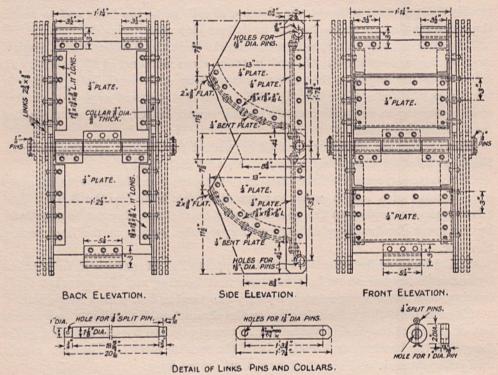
CIRCULAR TYPE OF ELEVATOR BUCKET.
